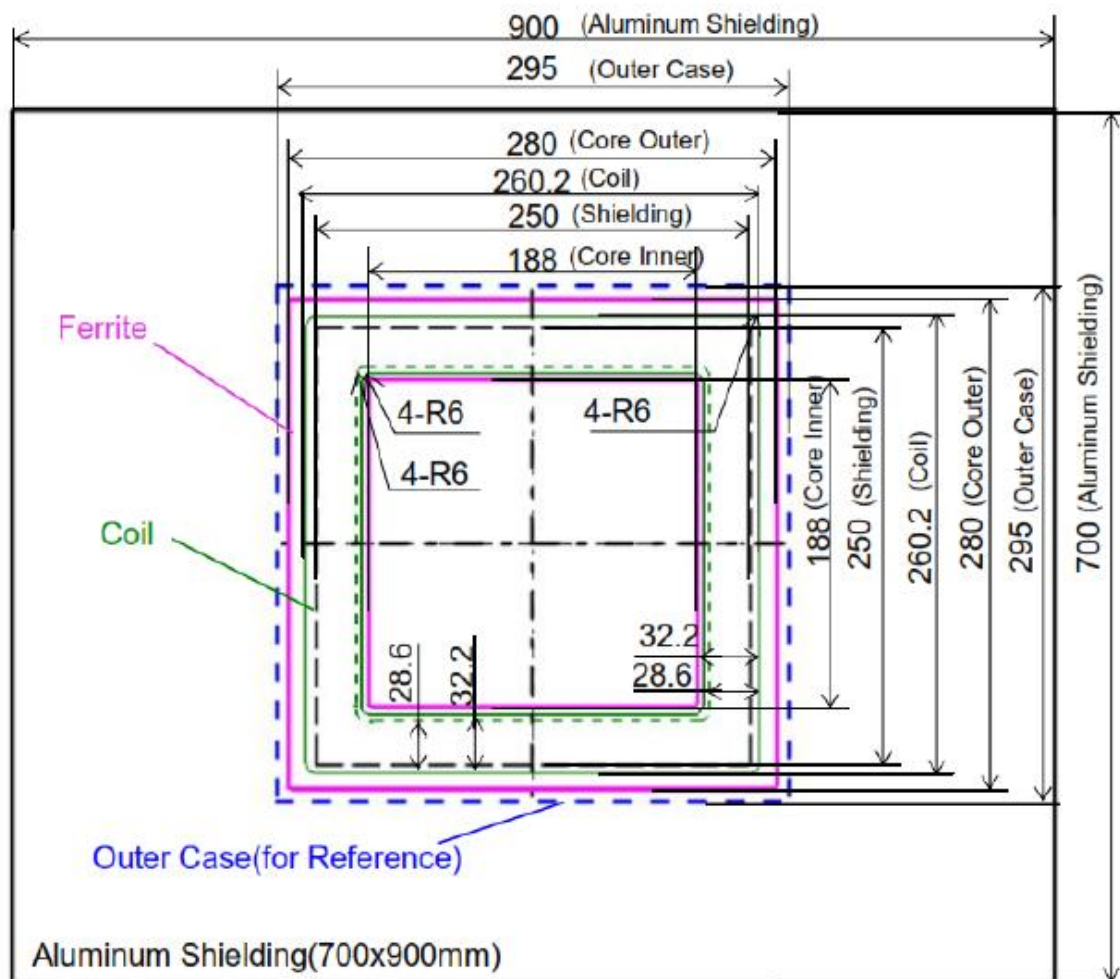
Mechanical dimensions of the M-VA- WPT1/Z1
